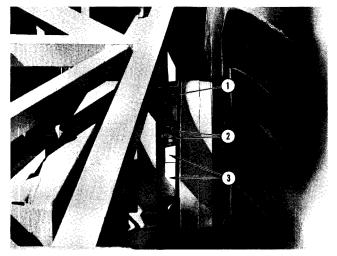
INNER AXLE BLOCK 3. Axle Blocks 1. Brake Mount
